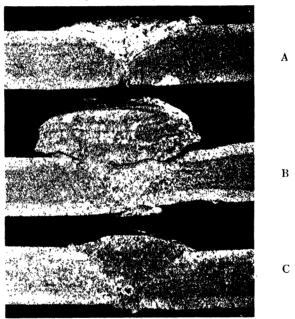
A macroscopic picture of an etched weld cross-section: A (top). Carbonized, B. Oxidized weld, C. Neutral flame weld
